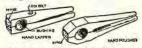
(right). Cleaning roughened surfaces of crankshaft bearing pins with emery strips.
